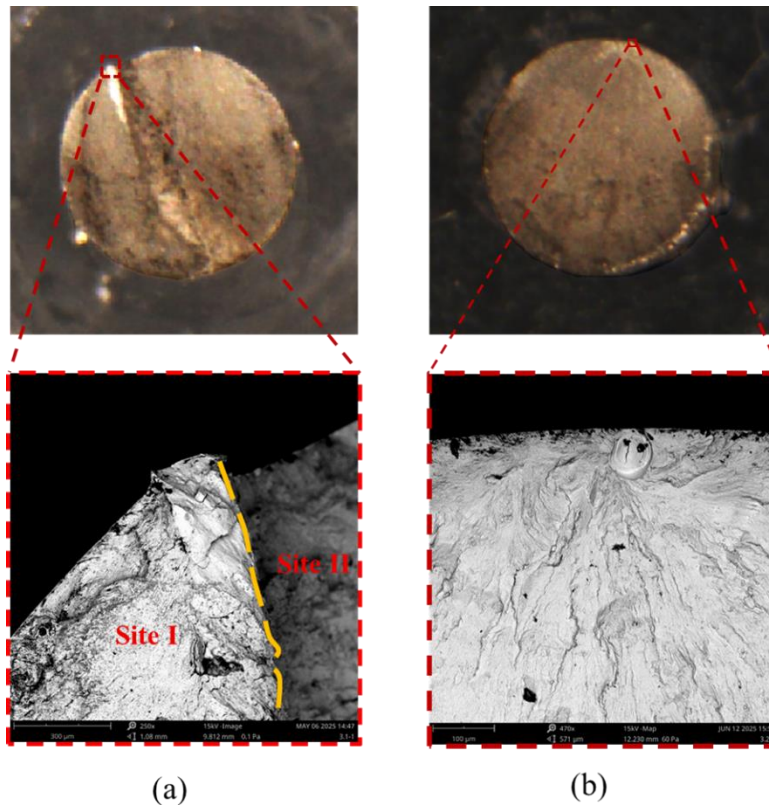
Fatigue fracture surfaces of two LPBF Inconel 718 specimens with identical design, showing (a) multi-site crack growth at 500 MPa, and (b) single-site crack growth at 300 MPa.
